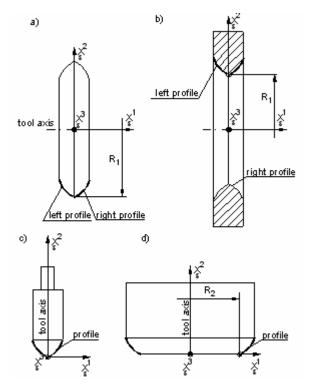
Tool type: a - disc; b - ring; c - finger; d - cup.
